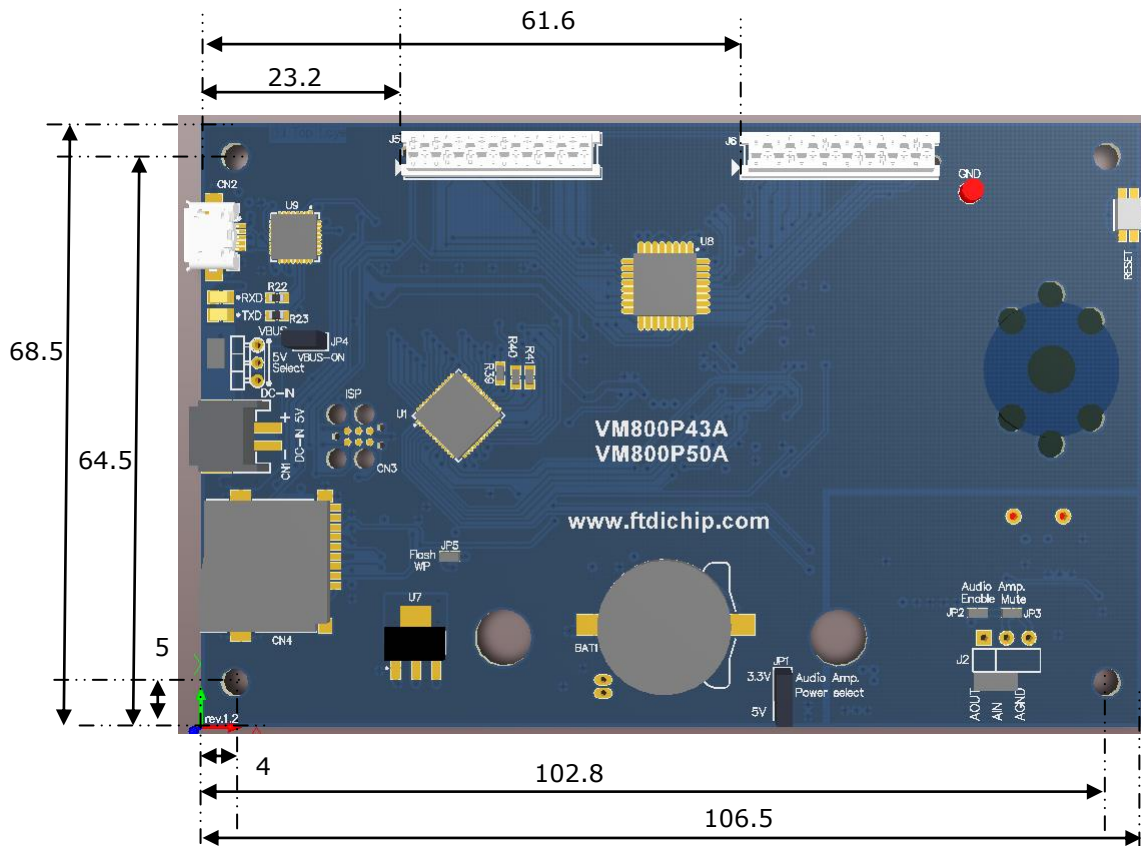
VM800P43A/VM800P50A Dimensions (Top view)
